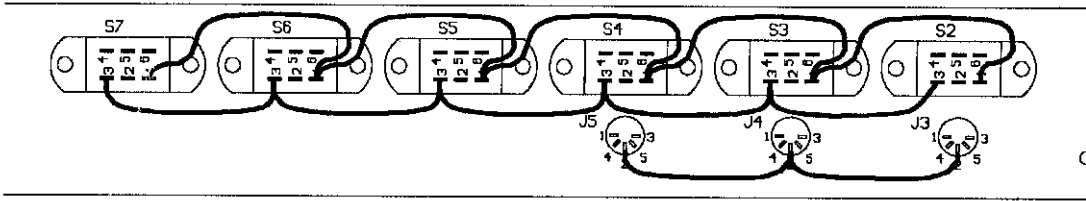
Some preliminary wiring is done on the front panel jacks and switches before the circuit board is installed.
